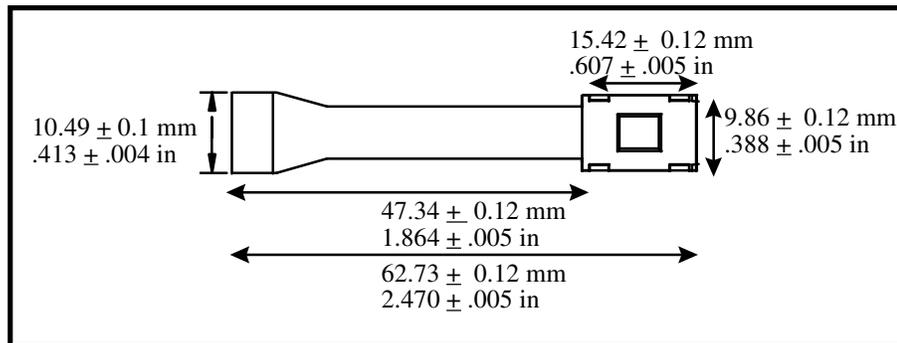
CyberDisplay™ 320 Display Dimensions Side View
